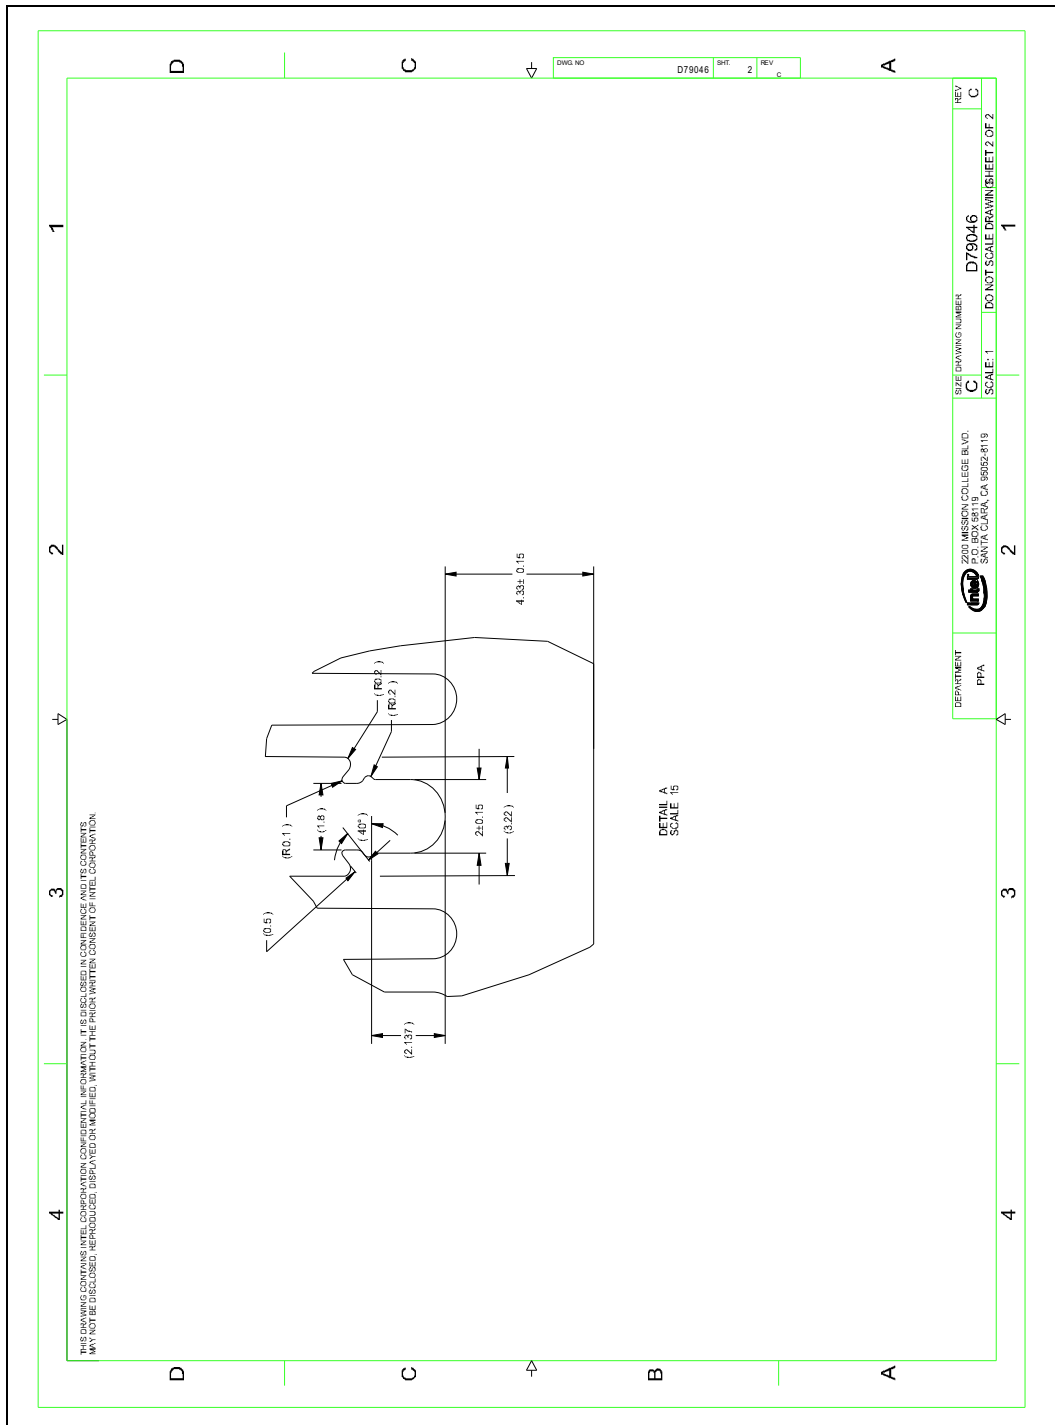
Short Torsional Clip Heatsink Assembly Drawing
